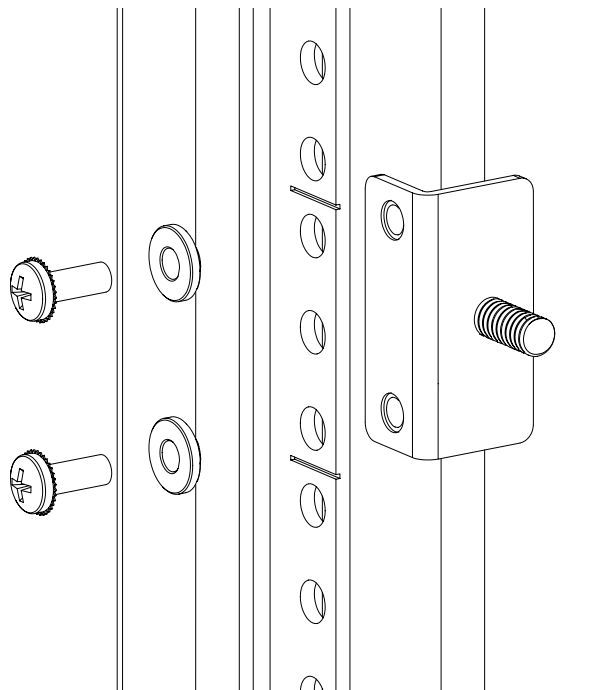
Installing the rear mounting brackets (HP System/e rack-left rear upright)
